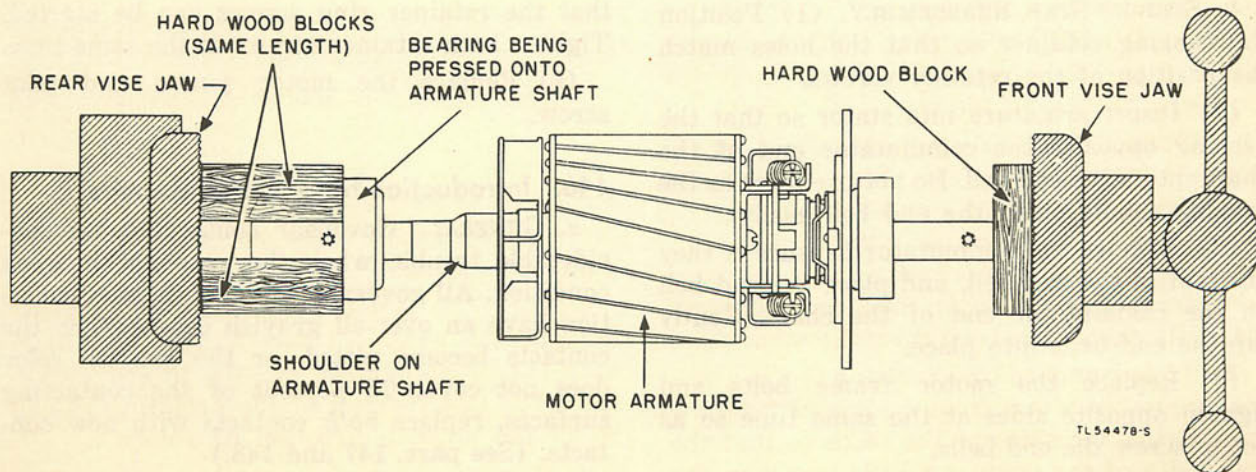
Pressing armature bearing onto its shaft by use of a vise.
